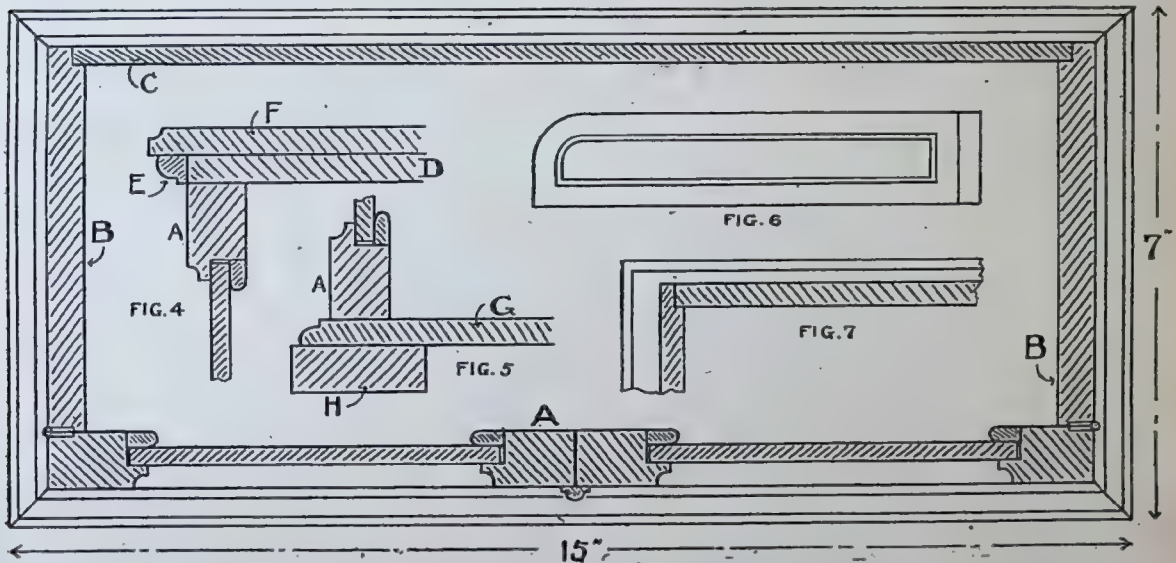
SECTIONAL PLAN OF INLAID CABINET.
